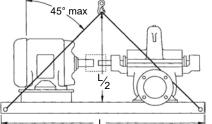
The proper lifting method for a horizontal pump on a base with lifting holes
